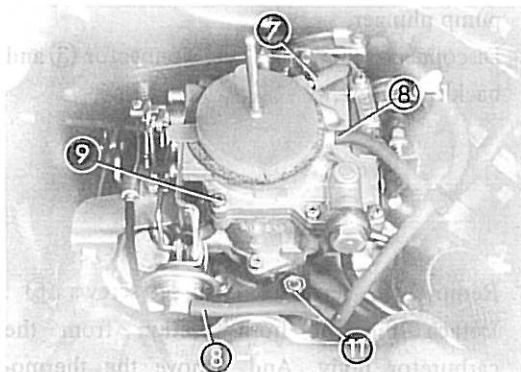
Removing Air Horn and Carburetor Assembly
